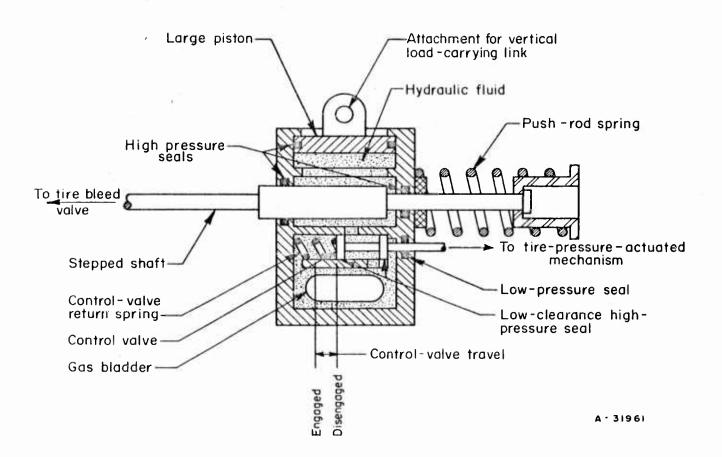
PROPOSED LOAD- AND PRESSURE-SENSOR CYLINDER
